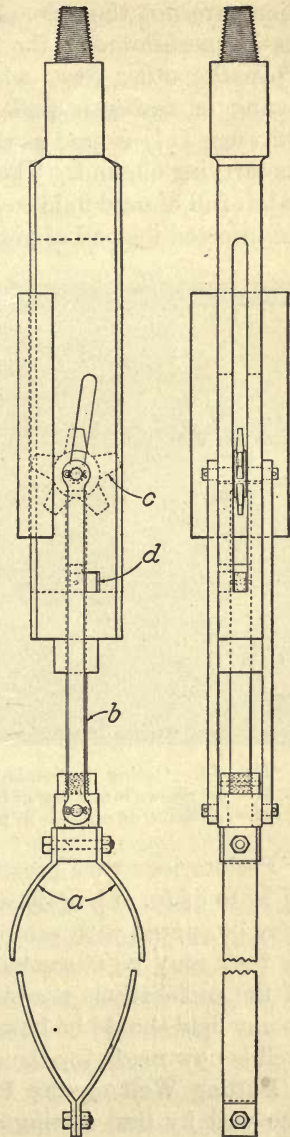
Star perforator. (a) spring; (b) mandrel; (c) rolling knife; (d) lug.
